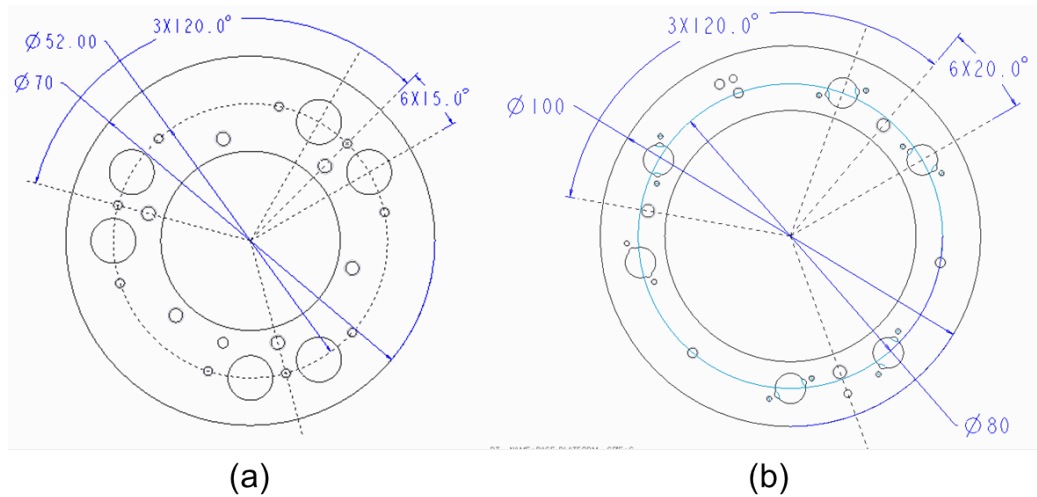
(a) Parallel robot moving platform dimensions. (b) Parallel robot base platform dimensions
